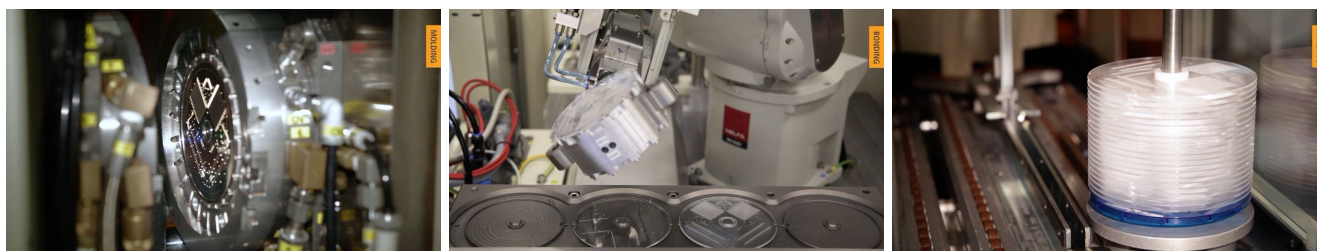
Automated Manufacturing Line. Parts are injection molded and assembled using a high-precision, automated line capable of commercial-scale production.
